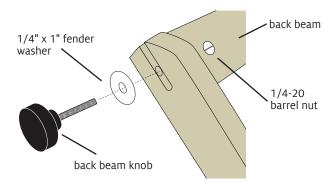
INSTALL REMOVABLE BACK BEAM
